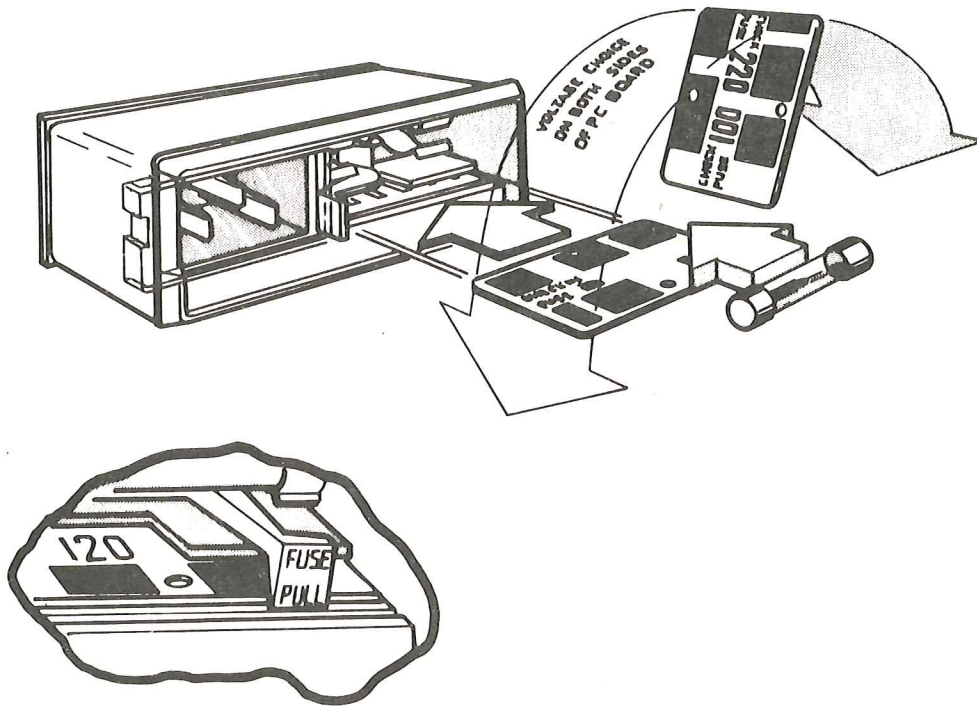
AC-INPUT RECEPTACLE AND FUSE ASSEMBLY
